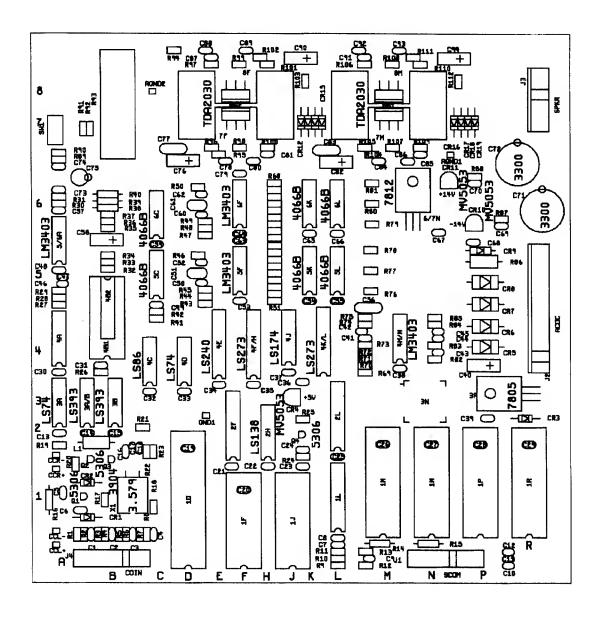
SAIIS (Audio) PCB Assembly A048479-XX A
